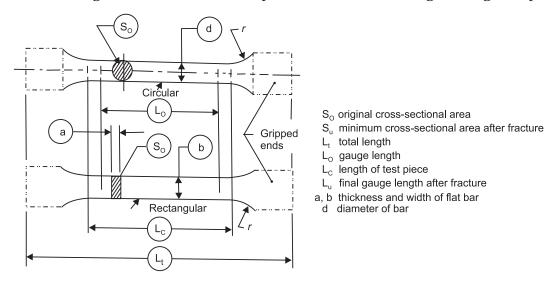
Test Pieces of Circular and Rectangular Cross-section
